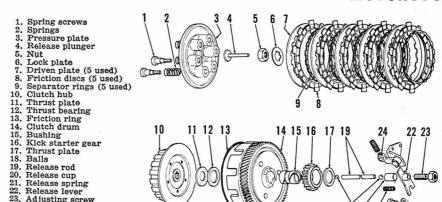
Exploded view of the clutch assembly. Parts (20 thru 24) are located in left cover.
